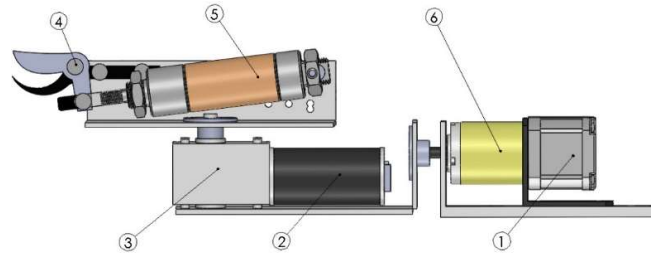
Concept design of end-effector: (1) main motor (M1), (2) orientation motor (M2), (3) self-locking worm gearbox, (4) pruner, (5) pneumatic actuator, and (6) planetary gearbox.
